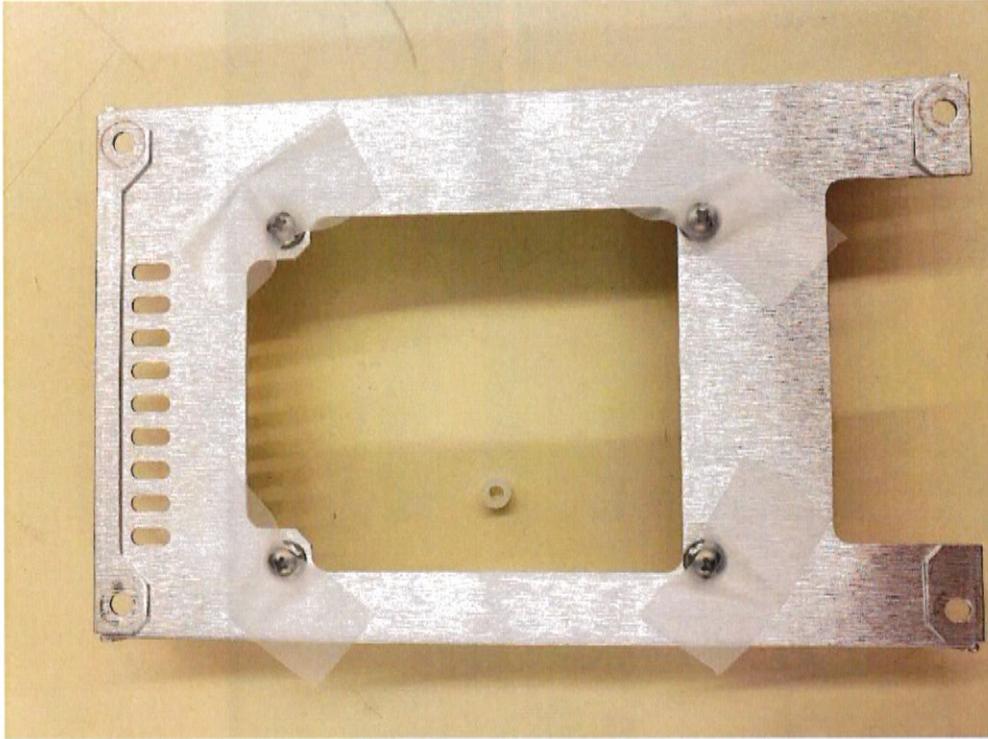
HDD/SSD mounting bracket. Showing the mounting screws held in place by tape.
